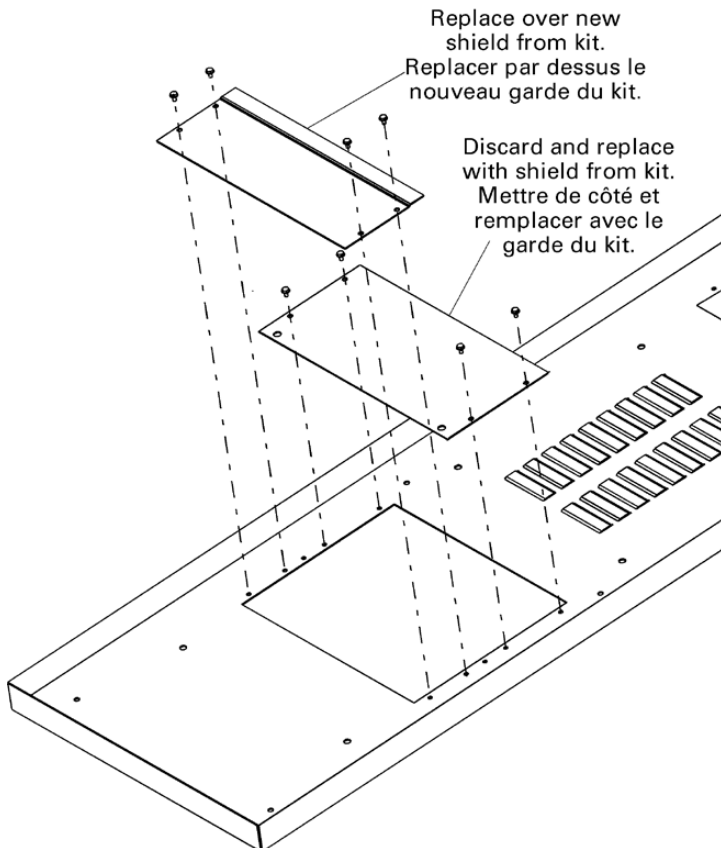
Attaching the shield inserts to the shield for a subfeed breaker installation in 400 A or 600 A panels.
